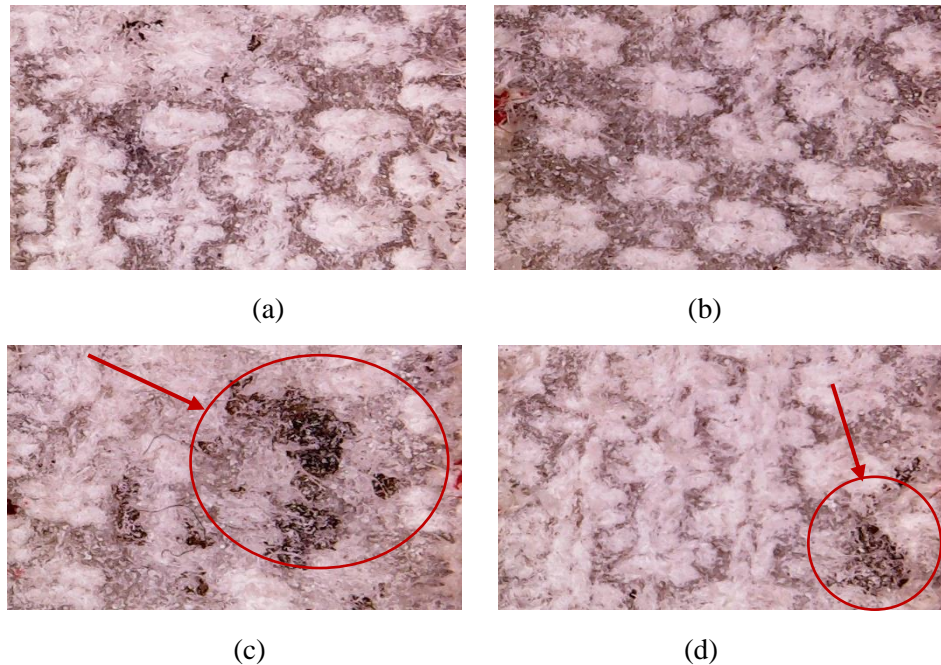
Spindle speed 1300rpm and feed rate 4 mm/min. (a) Initial condition, (b) of distance 3-6 cm, (c) of distance 6-8 cm, (d) of distance 8-10 cm
